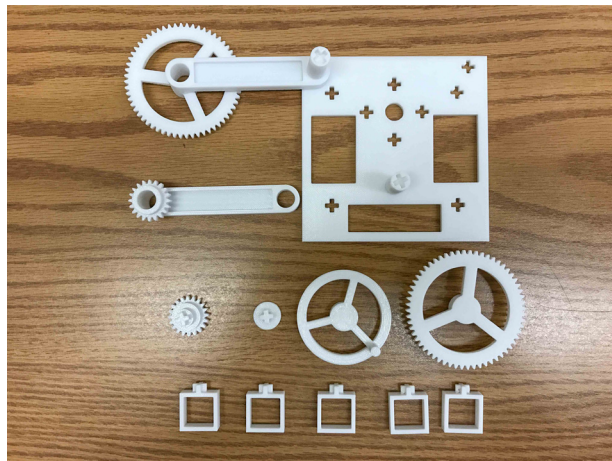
A photograph of the component parts of the trifolium drawing mechanism that were manufactured from acrylonitrile butadiene styrene using additive manufacture
